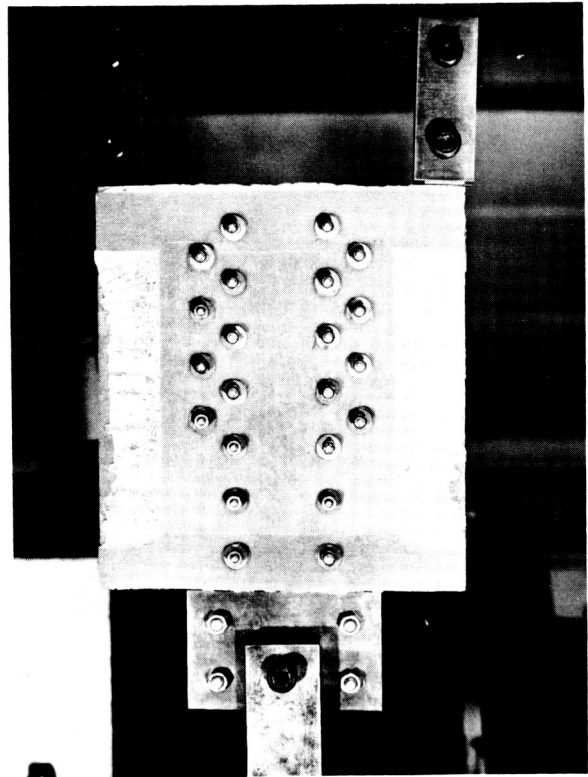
Fastener Pattern Test Specimen of Half of One of the Beam's End Support Points
